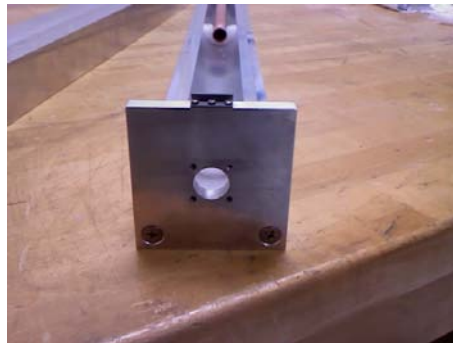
Unloaded Receiver End with Latch Keeper Plate
